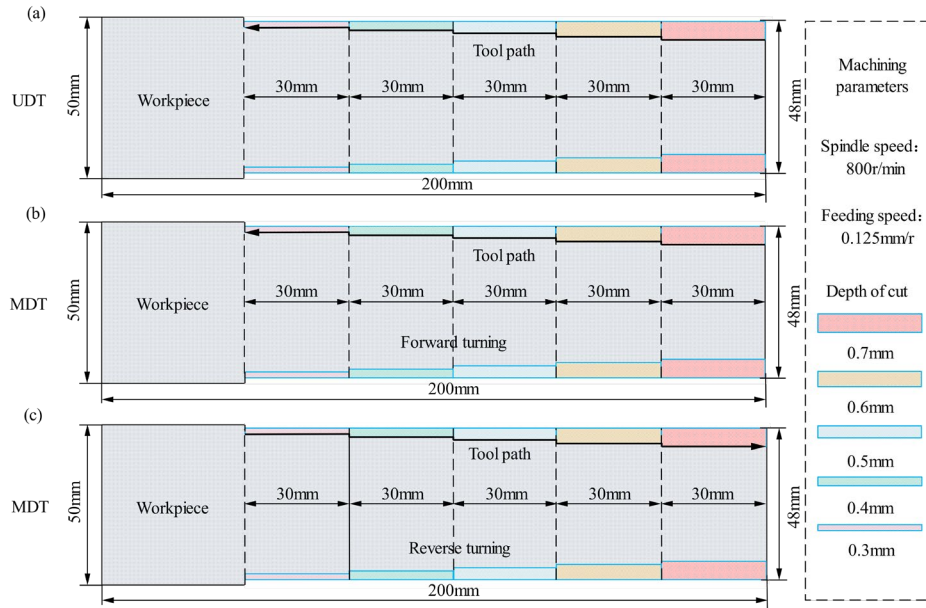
Cutting parameters and processing schematic for the second group of experiments. (a) Machining schematic for the UDT; (b) Machining schematic for the forward turning of MDT; (c) Machining schematic for the reverse turning of MDT.
